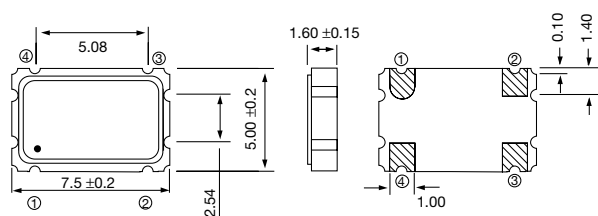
ECS-3951C/3953C Top, Side and Bottom views
